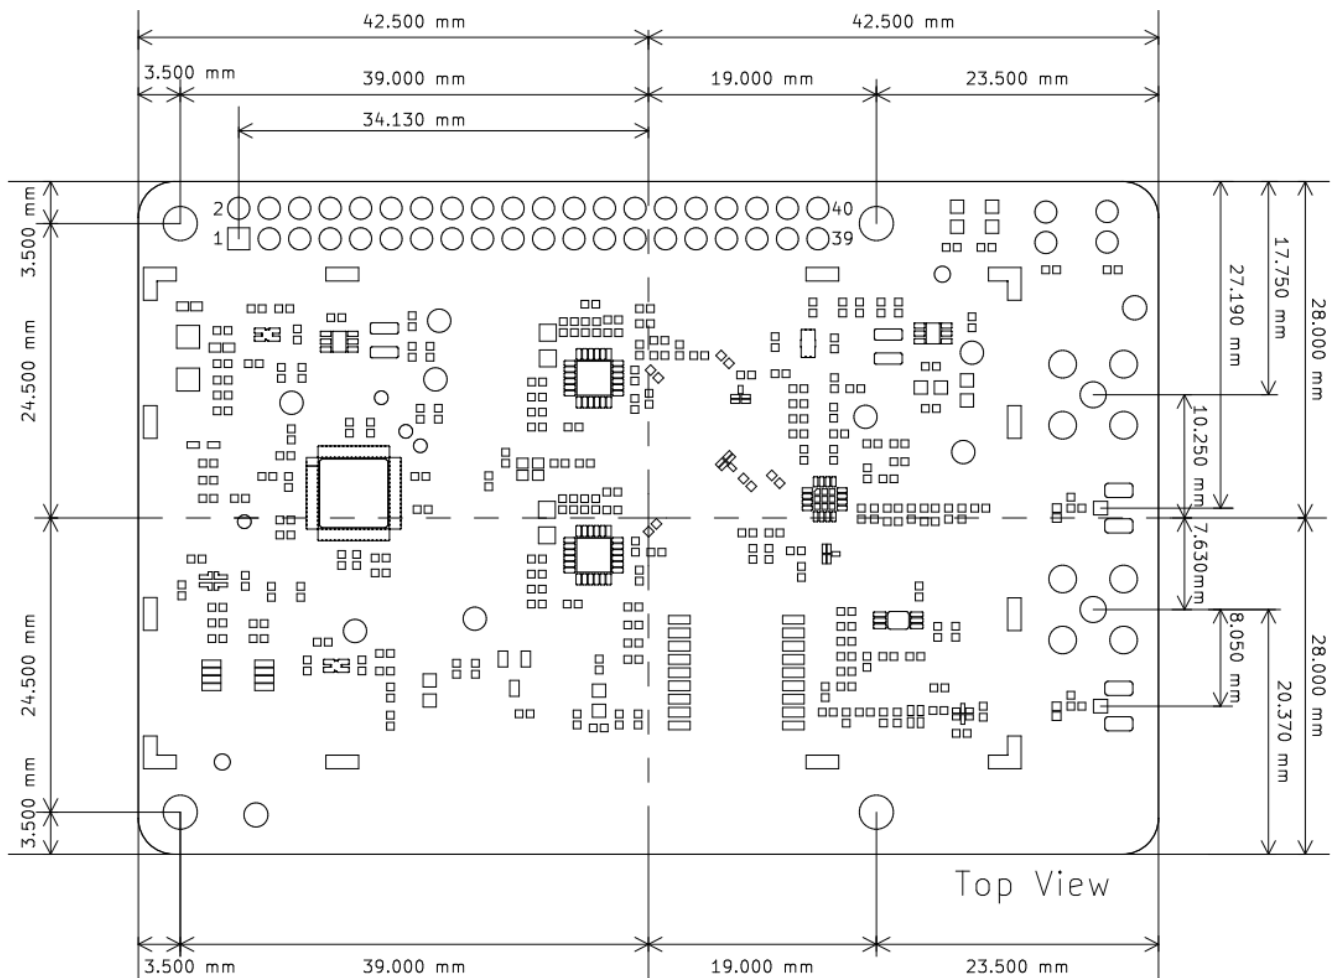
Concentrator outlines and pins of bottom connector in top view
